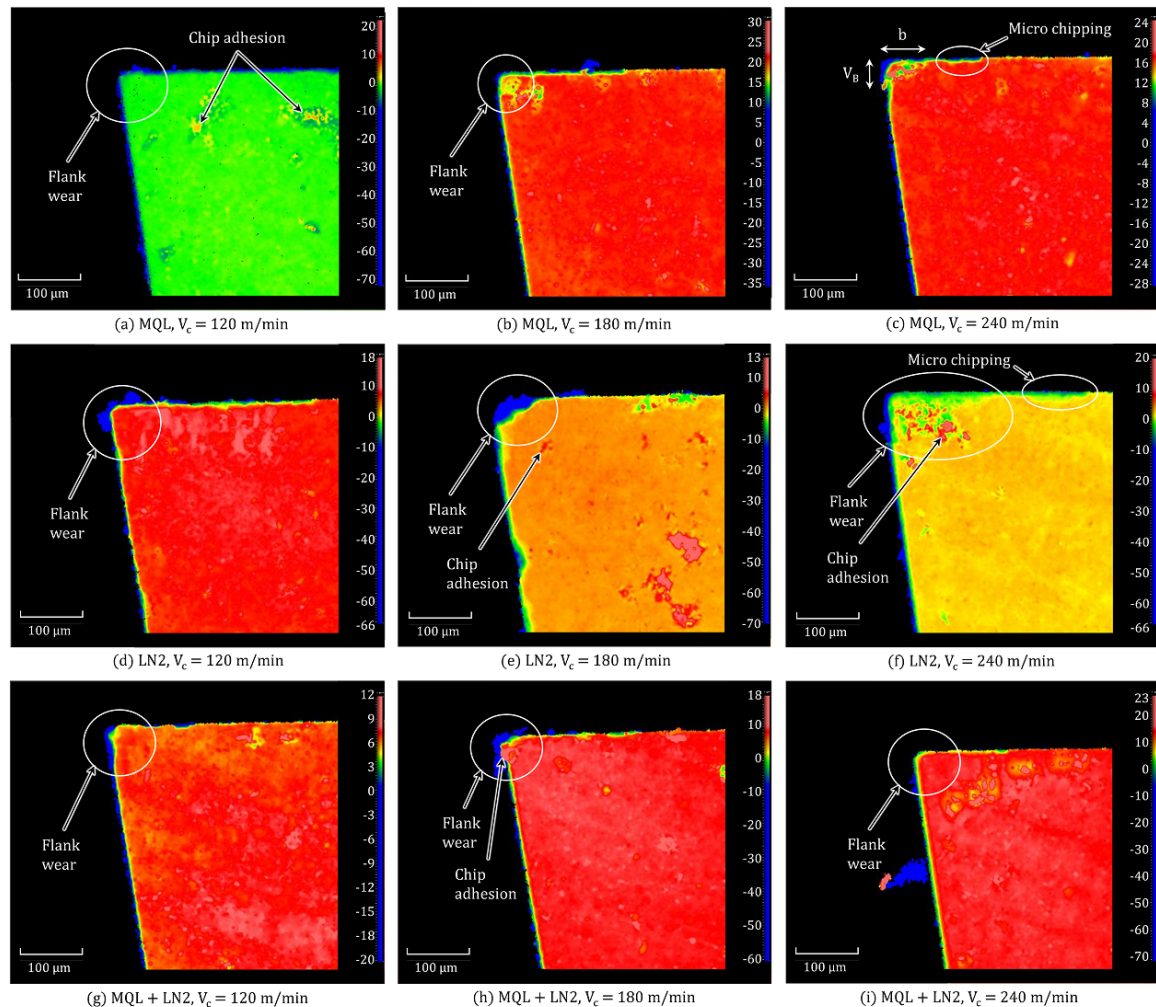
Microscopic images of tool flank surfaces showing flank wear including micro chipping near the cutting edge and chip adhesion at different cutting speeds under different machining conditions
